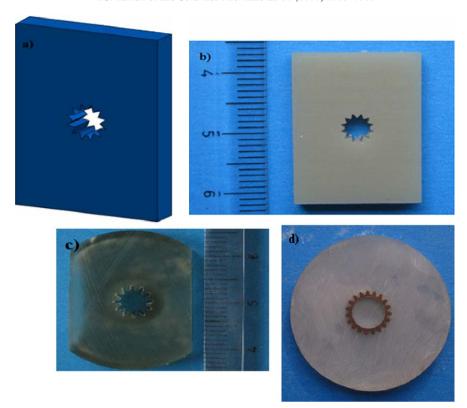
Solidwork designs of the mold (a), the mold prepared by rapid prototyping machine (b), one example of polymer-based molds (c), and gear shape metal substrate (d).
